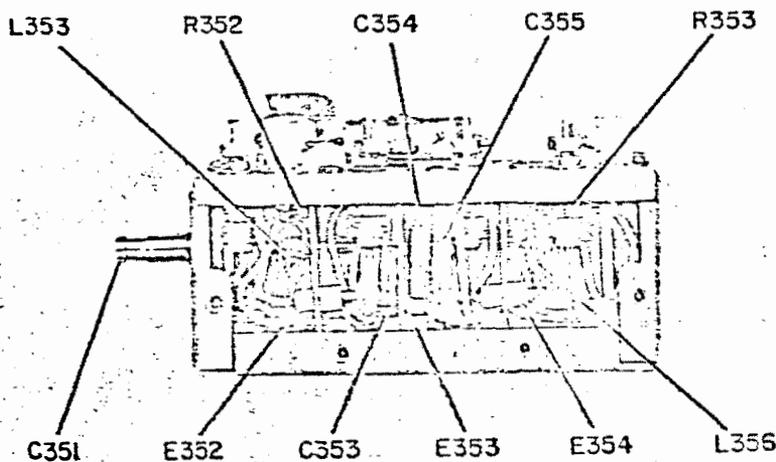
Tunable I-F Filter, Side View, Location of Parts
